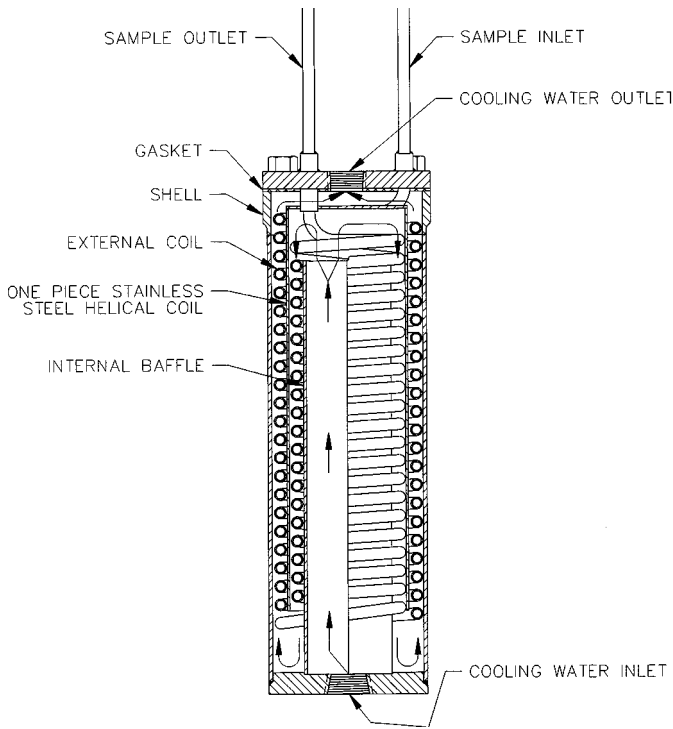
Helical Coil Heat Exchanger with Removeable Shell
